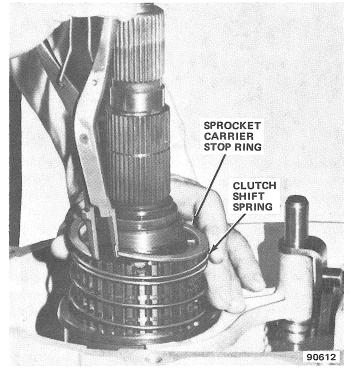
D-17 Sprocket Carrier Stop Ring and Clutch Spring Removal/Installation
